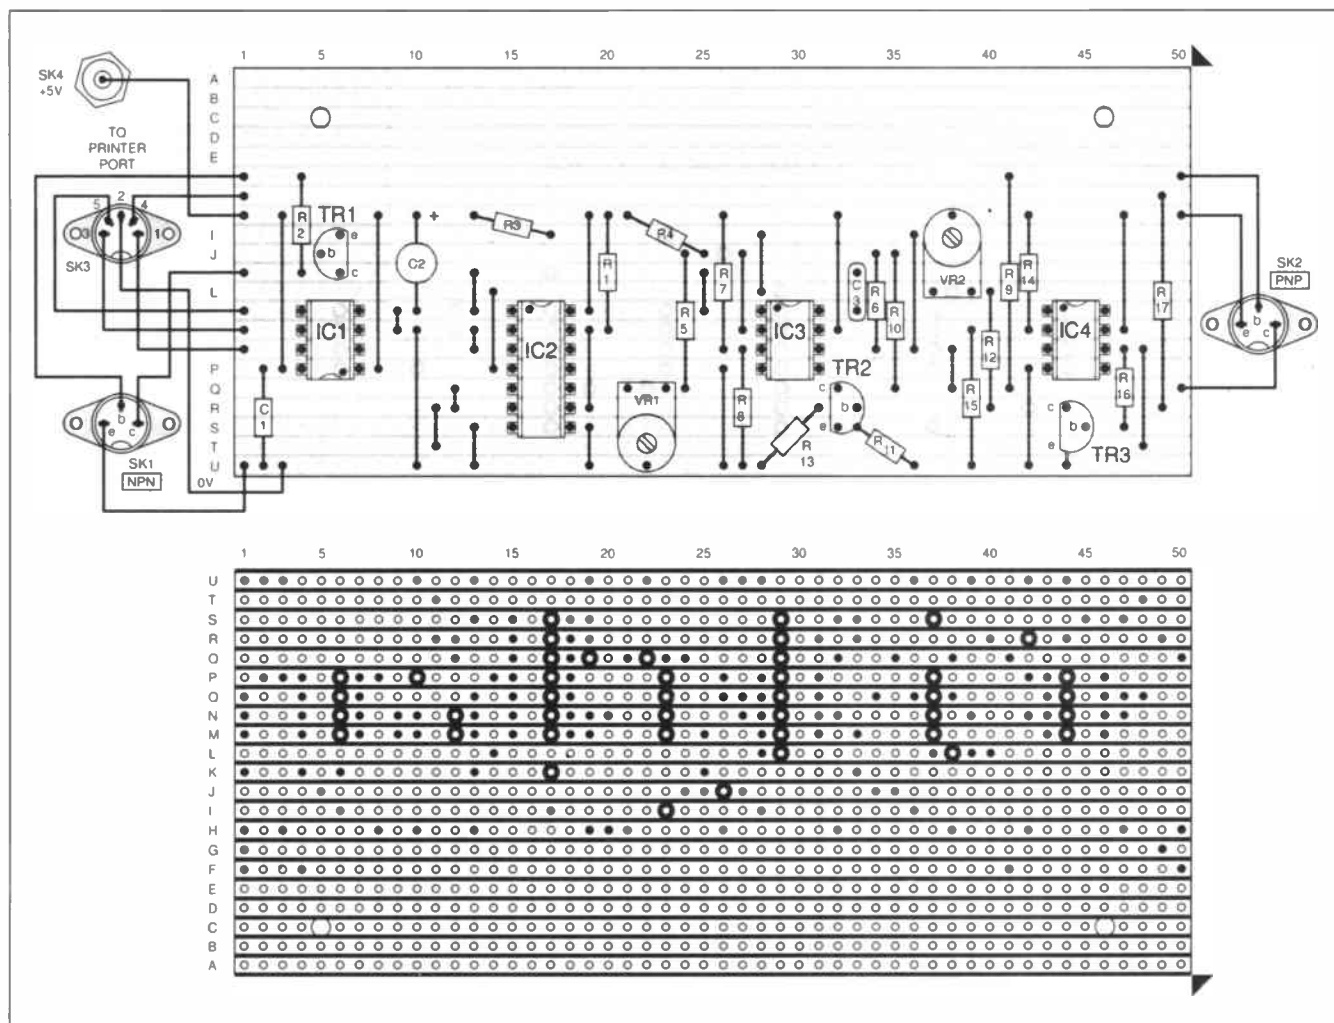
Stripboard topside component layout, interwiring and details of breaks required in the underside copper tracks.
